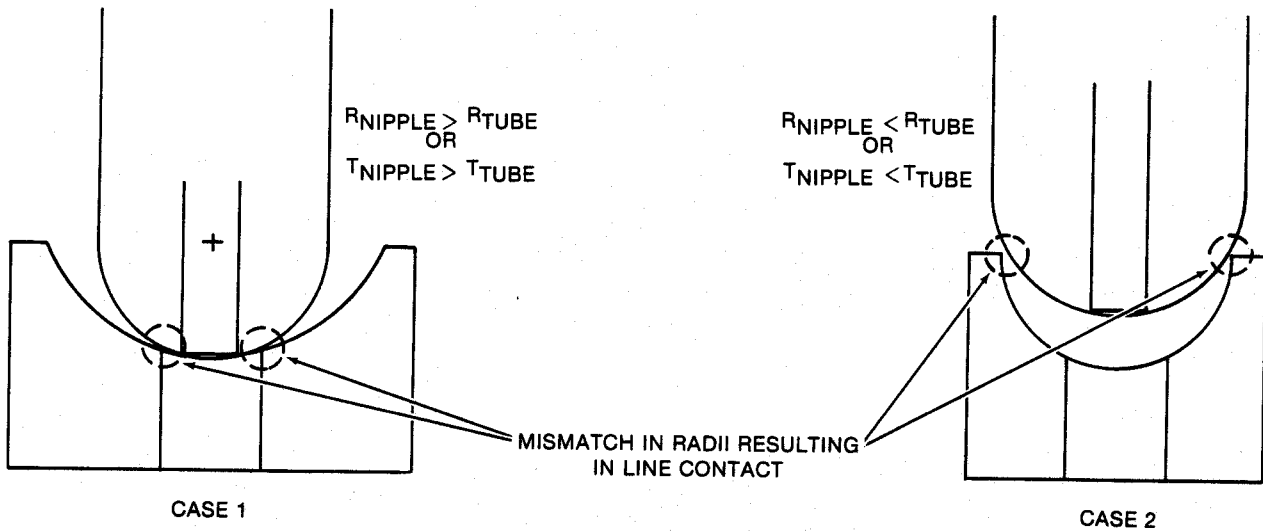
Ball and Socket Joint (Mismatches in Radii)
